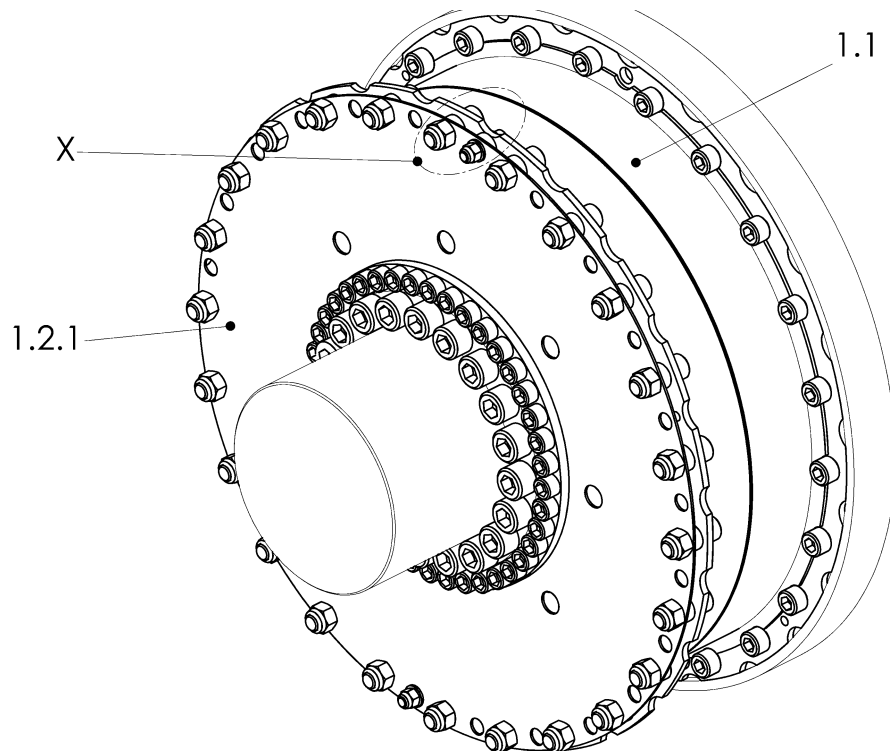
Connecting the assembly (1.1) and the membrane
